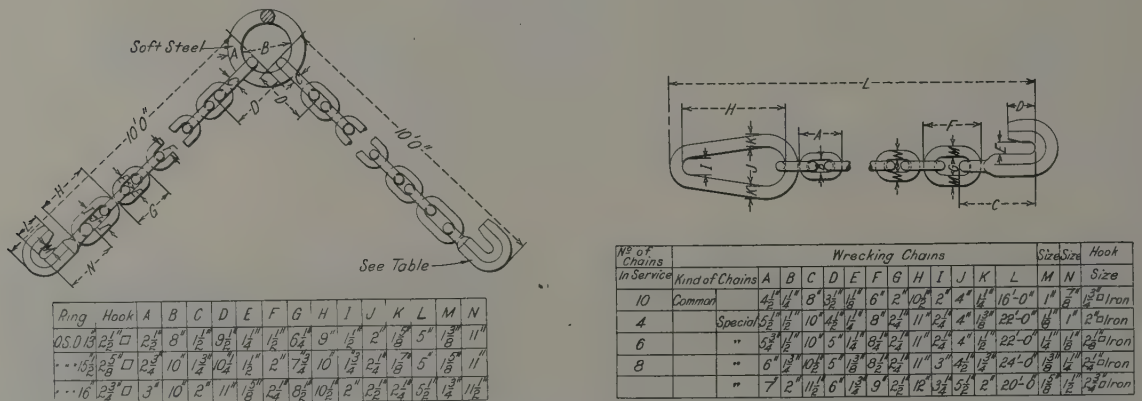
Dimension of Southern Railway Wreck Chains.
